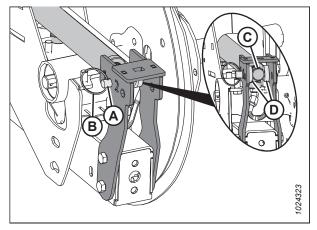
Right Reel Arm Cylinder in Aft Position
